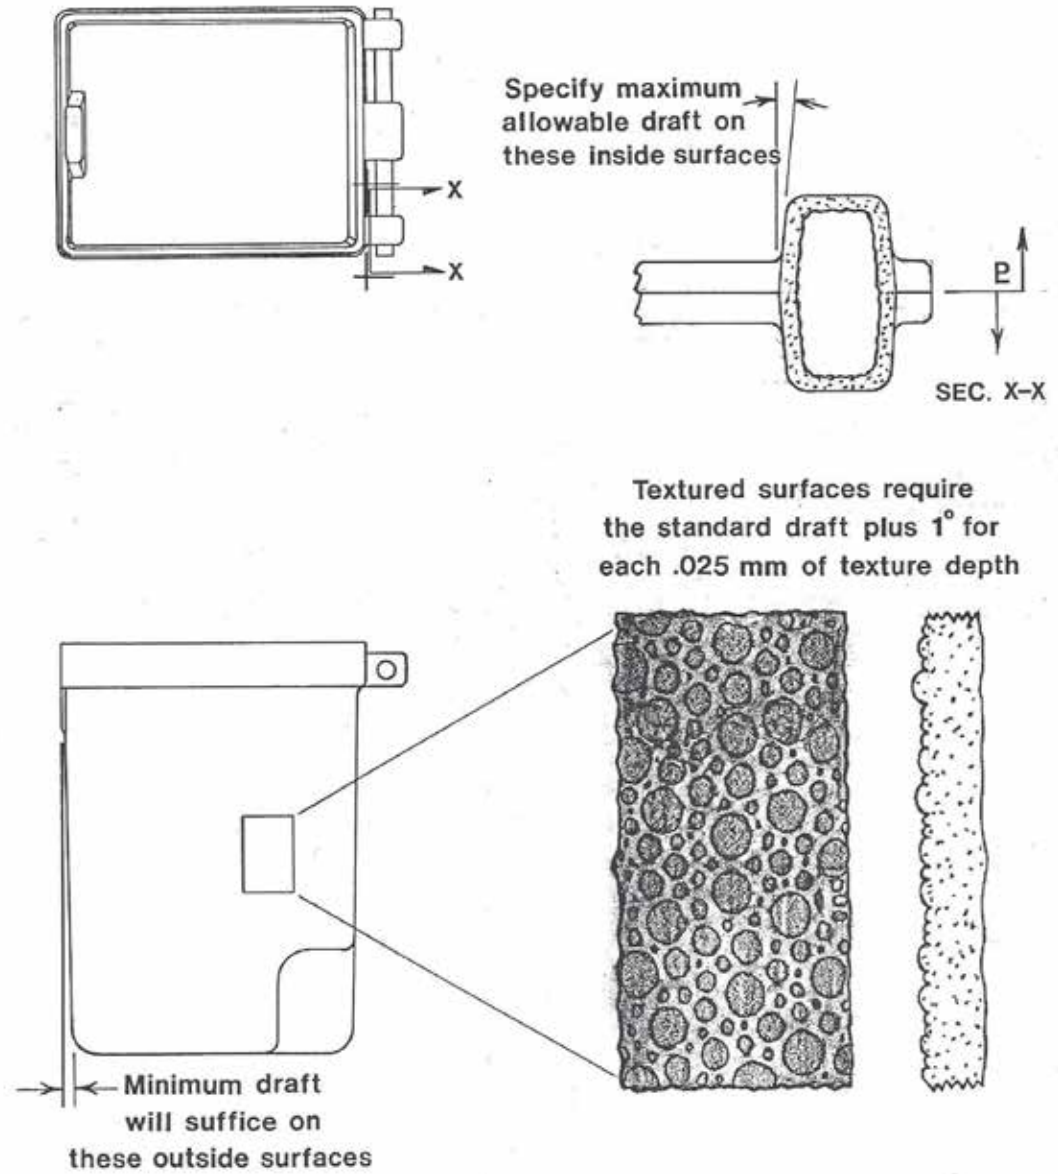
Molding-draft angle considerations on inside, outside, and textured surfaces. See Table 4
